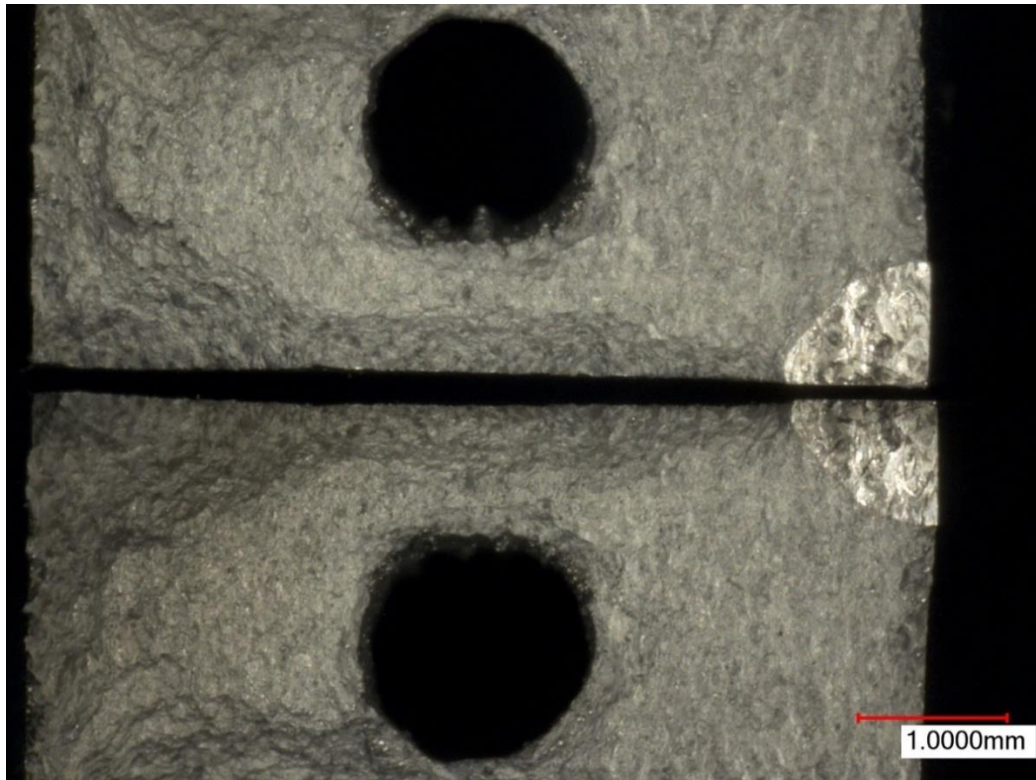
Specimen B1 fracture surface (500,000 cycles : 65.80 ksi / 453.7 MPa)
